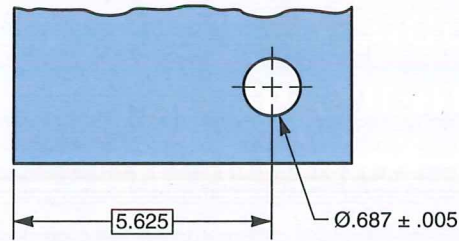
Basic dimensions are not toleranced. Instead, the feature that the associated dimension is referring to is toleranced.
